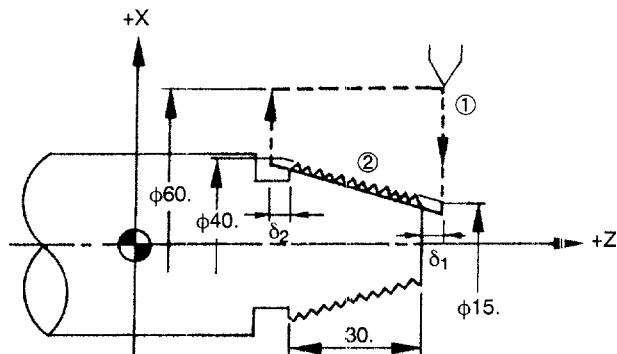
Example of Programming for Cutting Tapered Thread
